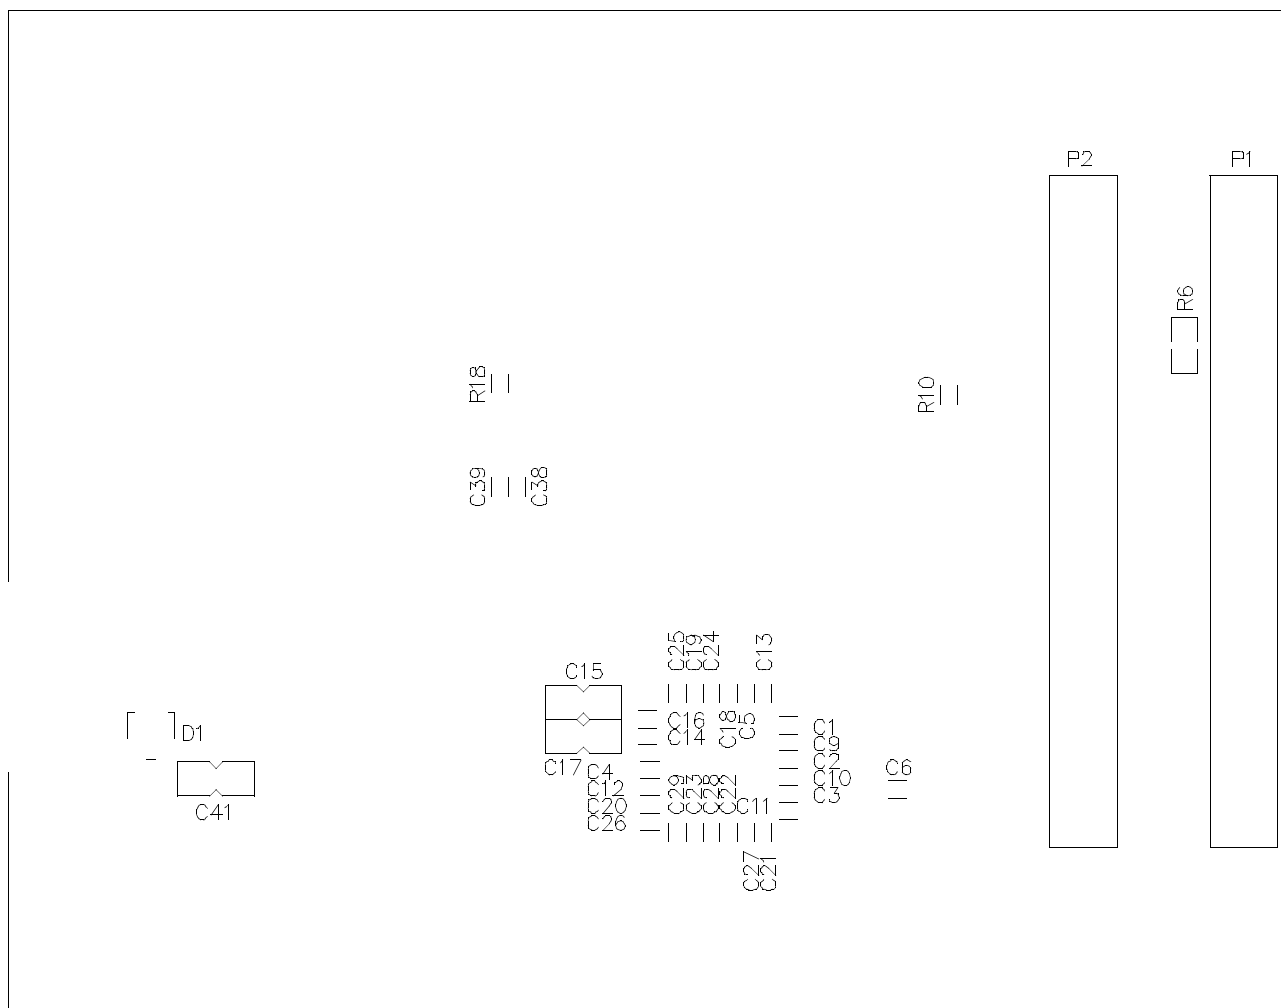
S5U13771P00C100 Board Layout - Bottom View
